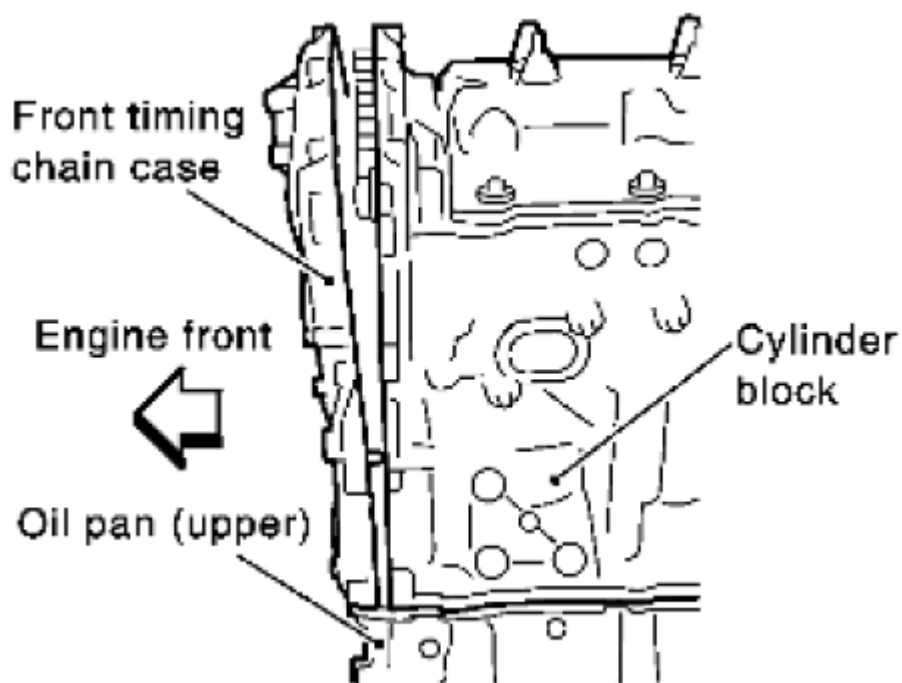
Identifying Front Timing Chain Case And Cylinder Block
